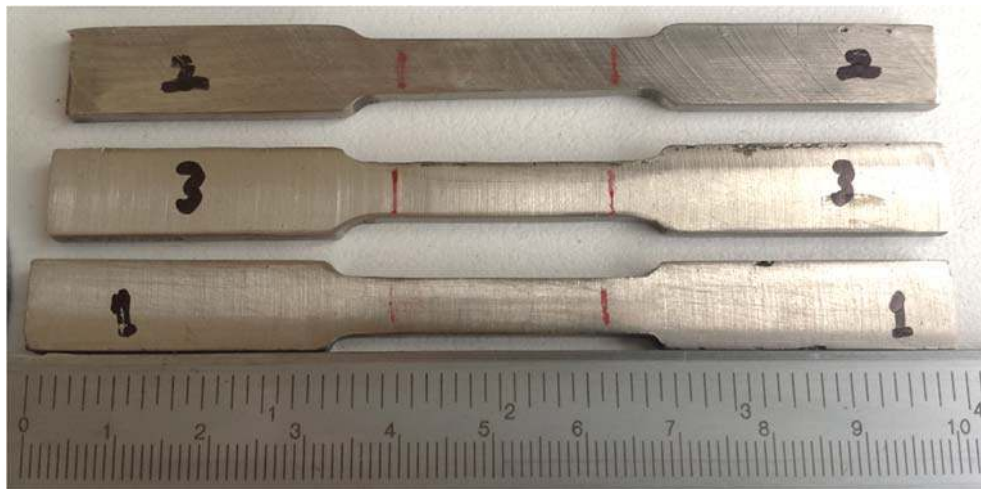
Photograph illustrates the sub-size tension specimens. Dimensions shown in Figure 3.39(a)
